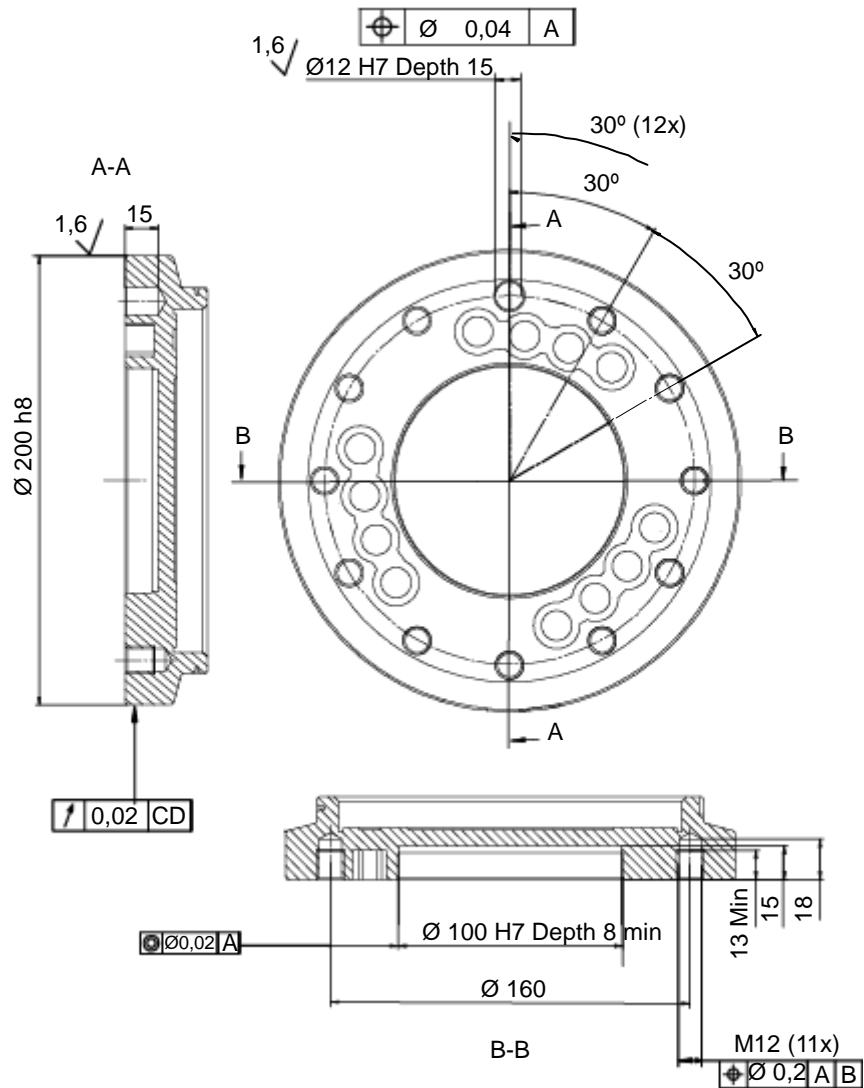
Robot tool flange ISO/DIS 9409-1:2002 (dimensions in mm).
